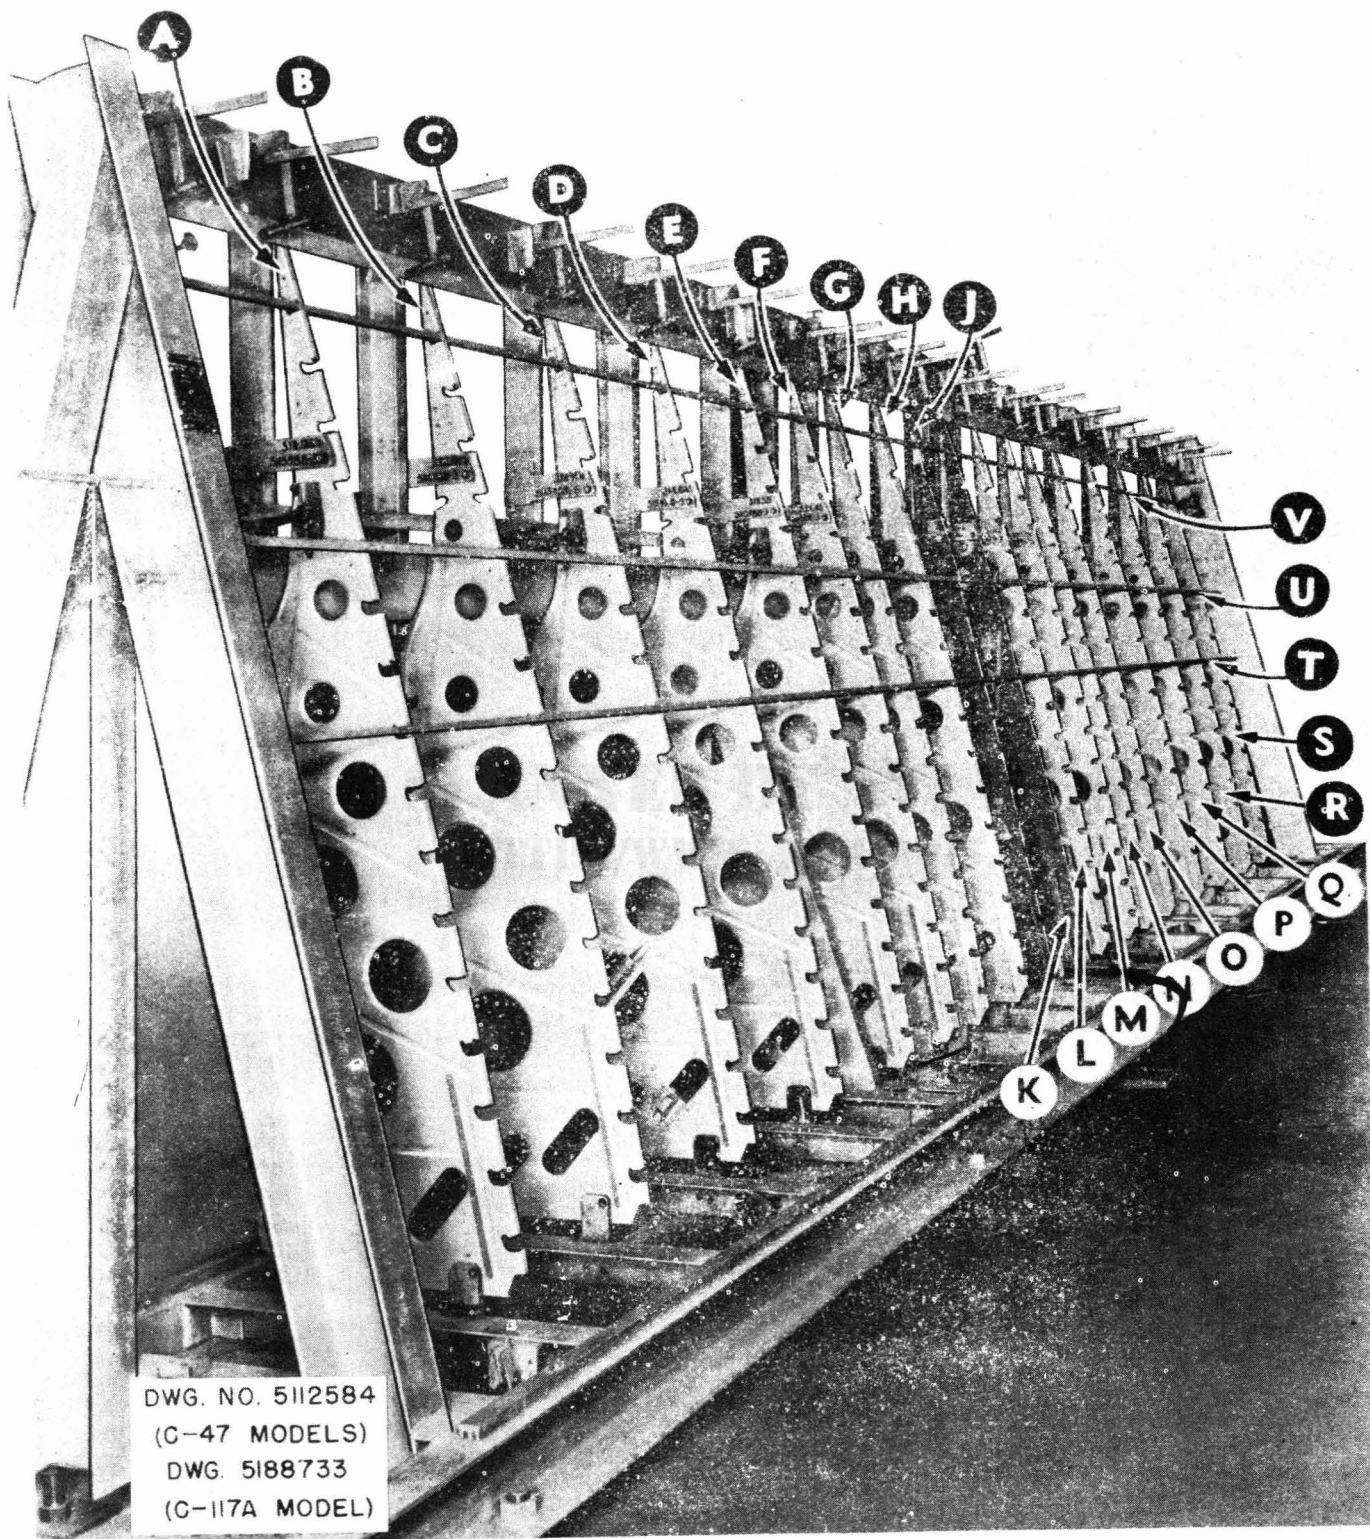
Center Wing Trailing. Section Frames (C-47 and C-117A Models)
